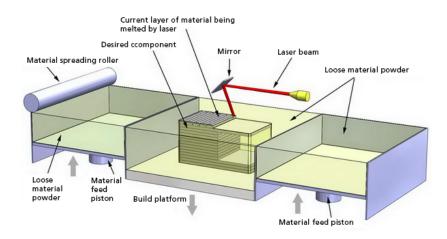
SLS is a powder technique using laser to build up the object. A thin layer of the desired material is spread out on a building plane and a laser beam melts the powder into a solid shape [29].
